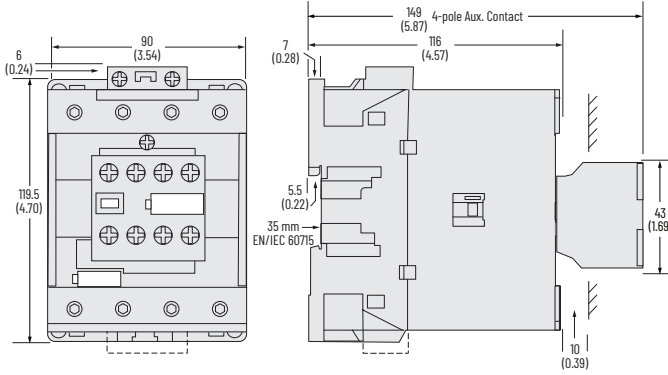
100-E80 4-Pole Contactors with Side-mounted Auxiliary Contact
